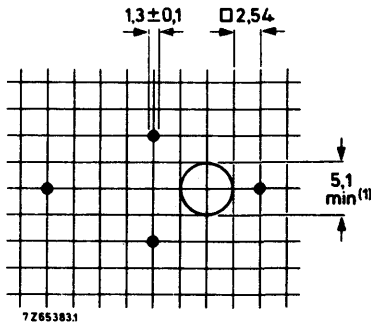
Hole pattern for mounting on a printed-wiring board.
